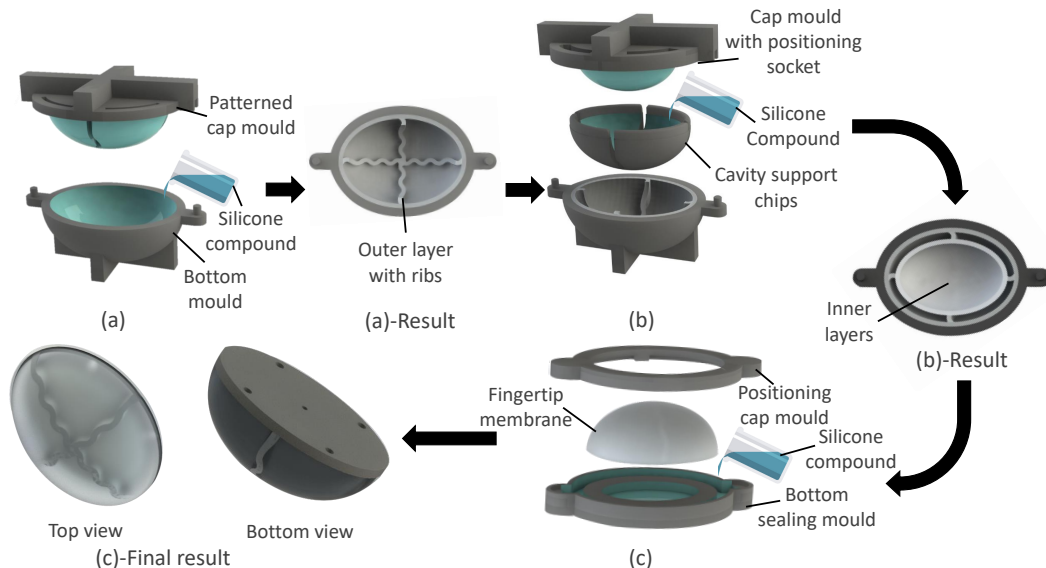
In the fabrication process of the fingertip sensor, moulds highlighted with blue colour means the surface is in contact with silicone compound: (a) The first step is to produce the outer layer and ribs. (b) The second step is to mould the inner layer. (c) The final step of sealing the fingertip sensor at the bottom.
